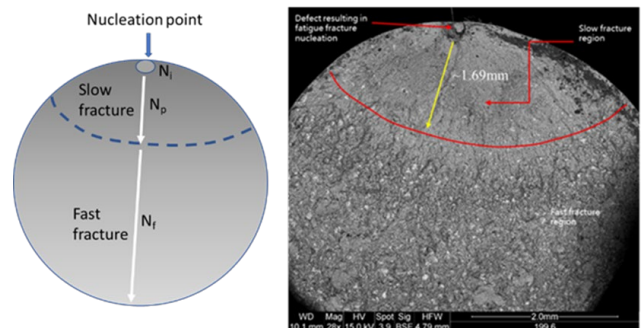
Example of a fracture surface of an axial fatigue fracture surface representing the fatigue fracture nucleation, slow fracture stage and the fast fracture stage. The SEM/BSE image is from a completed and examined axial fatigue test from Mackay et. al.⁷
